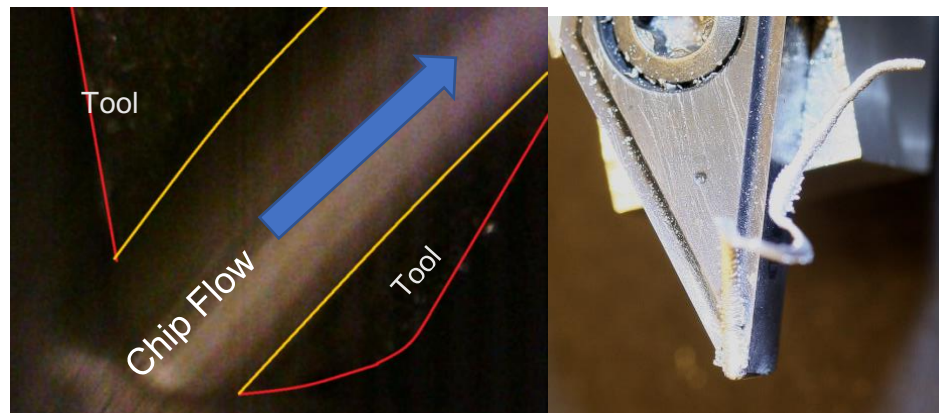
Schematic of Tool Removing a Chip from the Workpiece [4]
